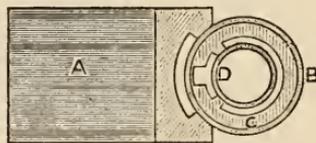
SECTION THROUGH UPPER PART OF LIMB AND BODY TUBES.
